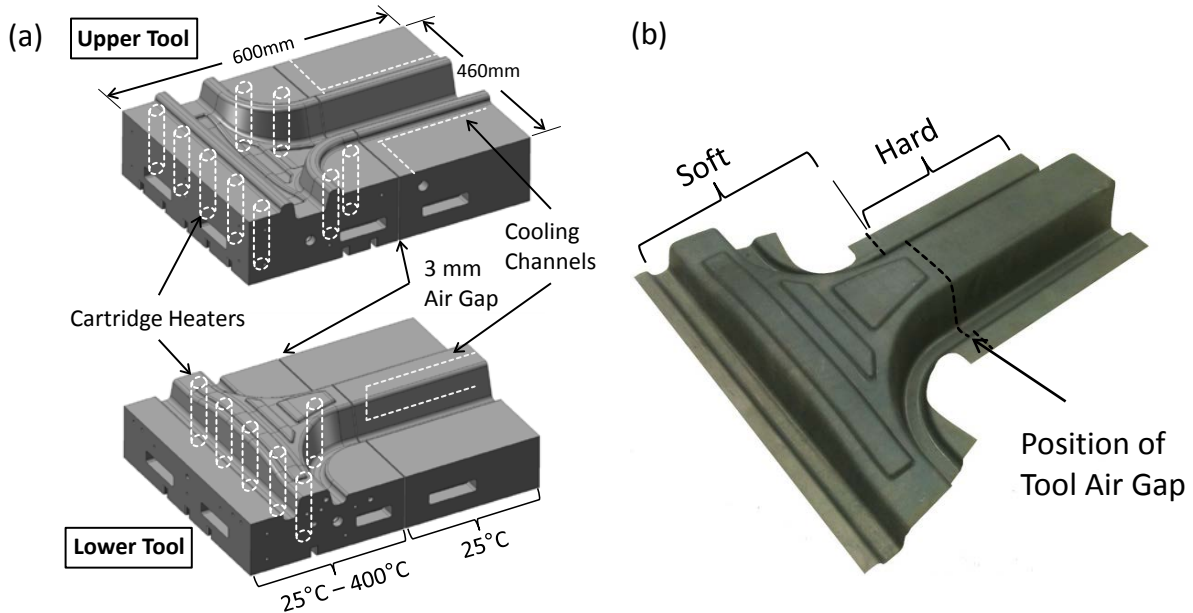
(a) A CAD model showing the design of the split tool with heated zones (b) A photograph of a hot stamped part.
